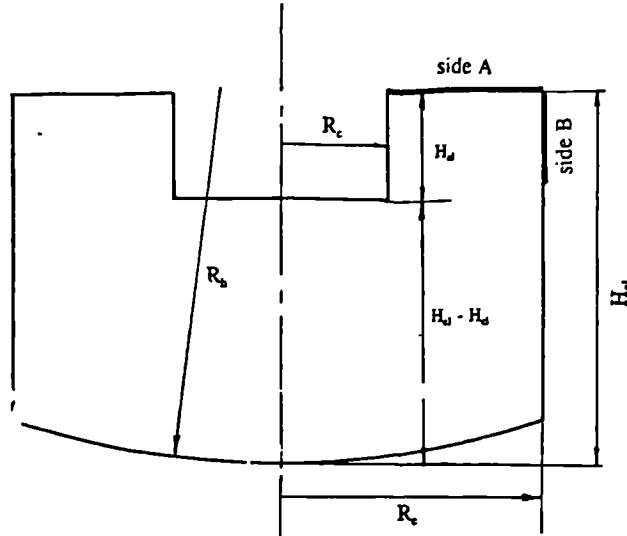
Schematic structure of a electrode in spot welding.
